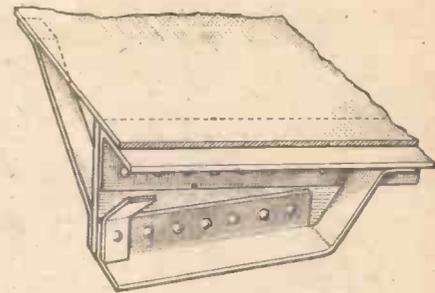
Part sectional view showing the construction of an aluminium skeg.
